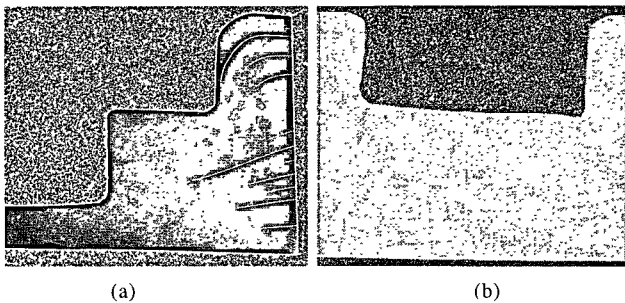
Cross sections of the superplastic forged workpieces (a) Ti6Al4V alloy; (b) 7475 Al-alloy.
